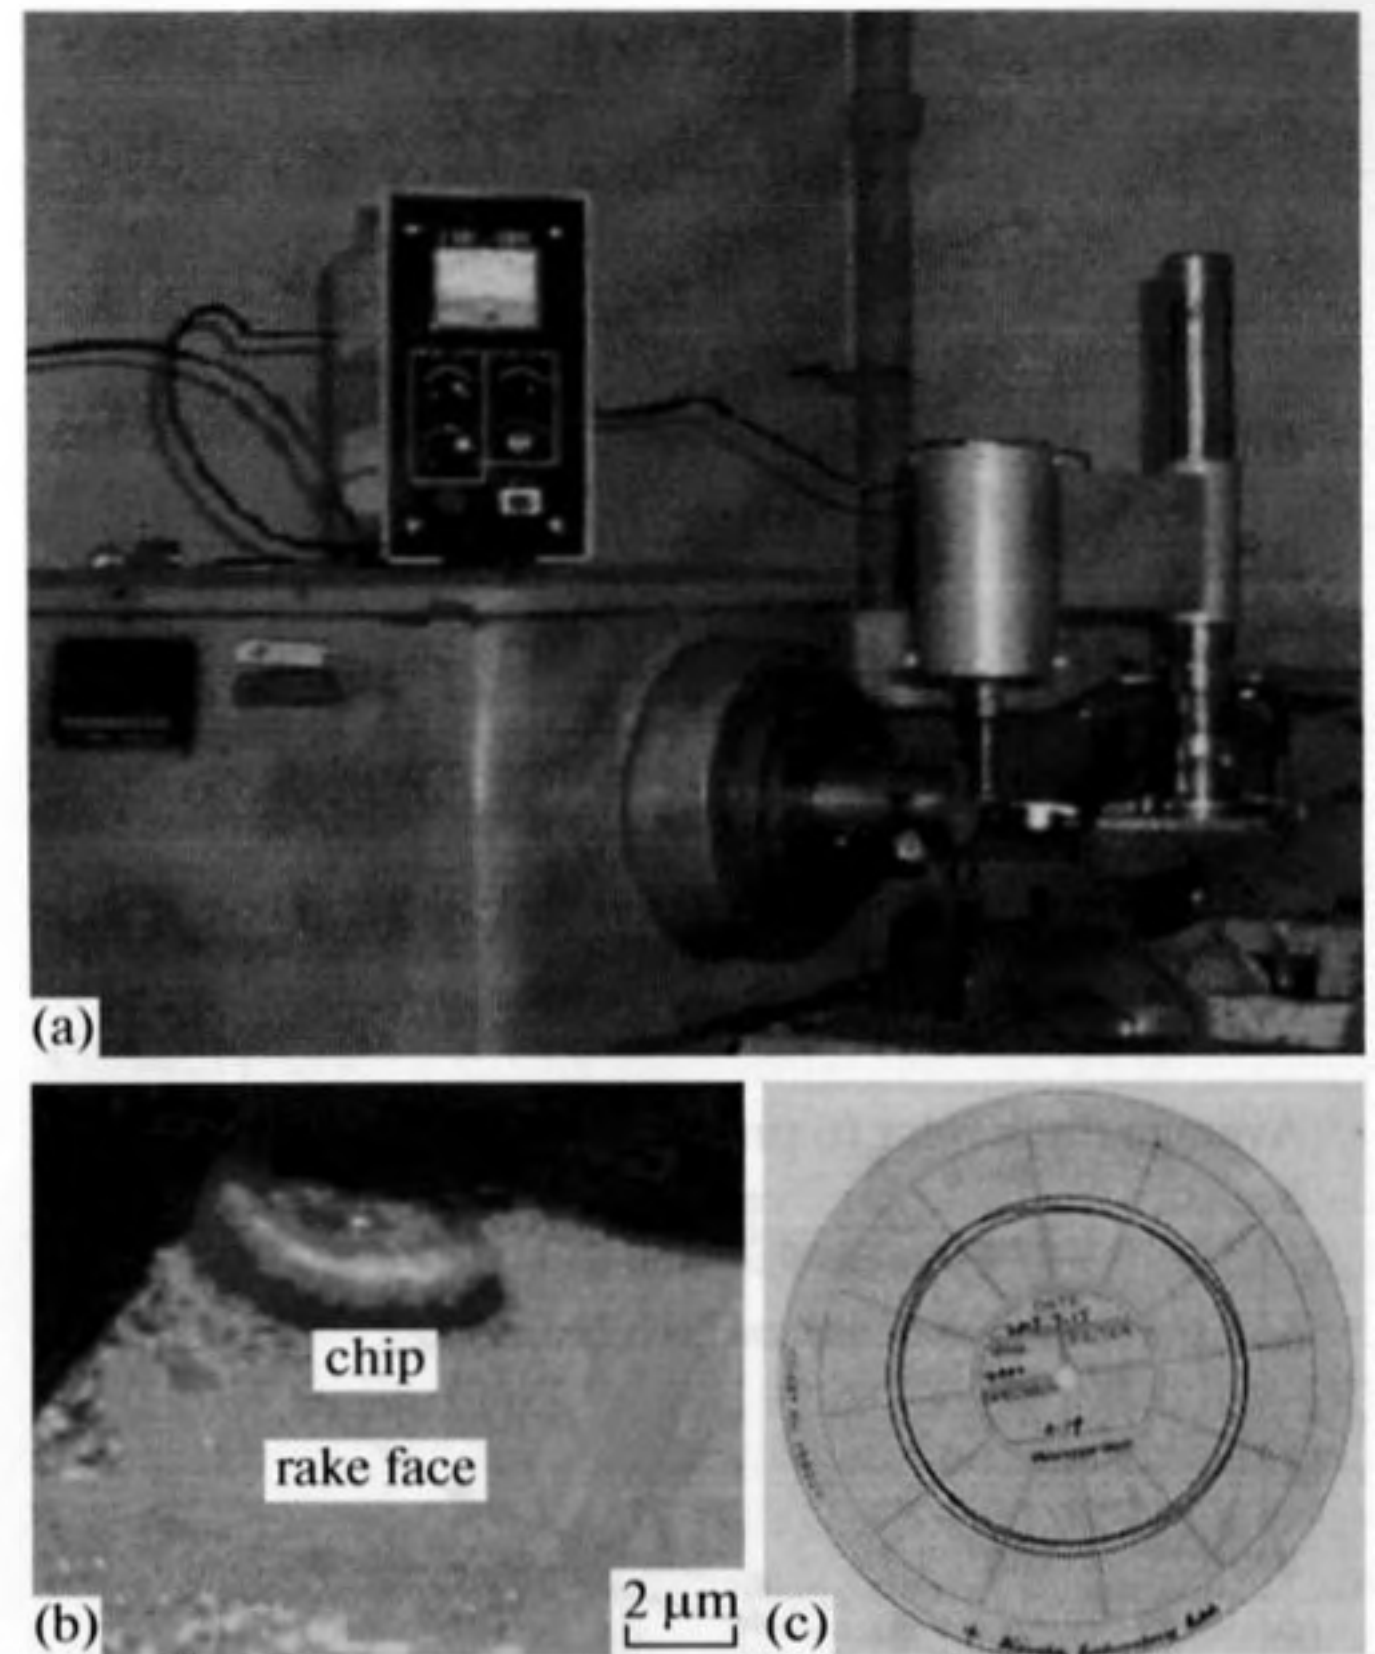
(a) The photo of processing sites; (b) Microphotographs of the cutting chips; (c) The flatness of the workpiece.
